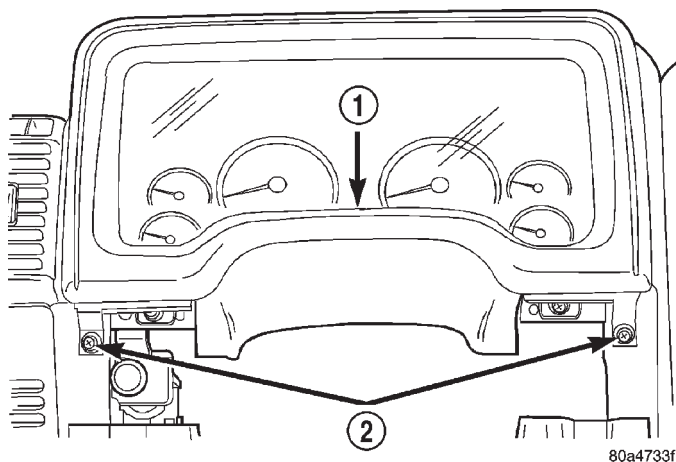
Cluster Bezel Lower Screws Remove/Install
